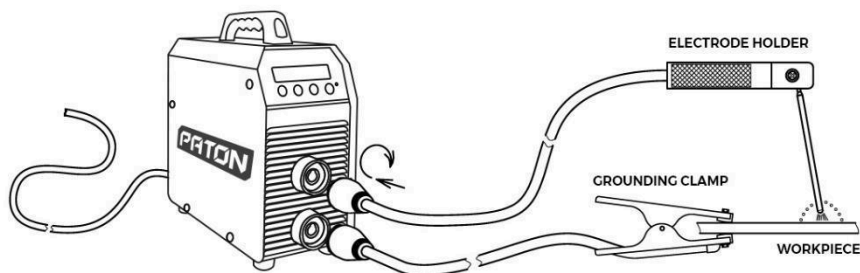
Electrical diagram of MMA stick welding machine
